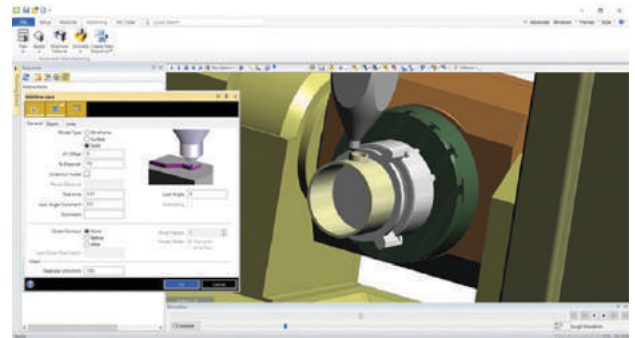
Hexagon EdgeCAM's knowledge of machine control in Additive DED machines
